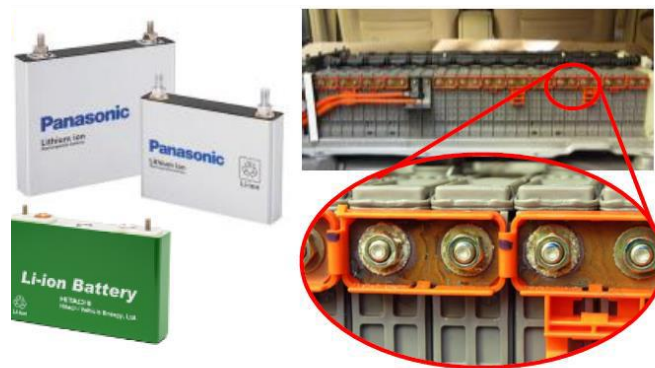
Mechanical assembly - prismatic cell nut and bolt configuration
